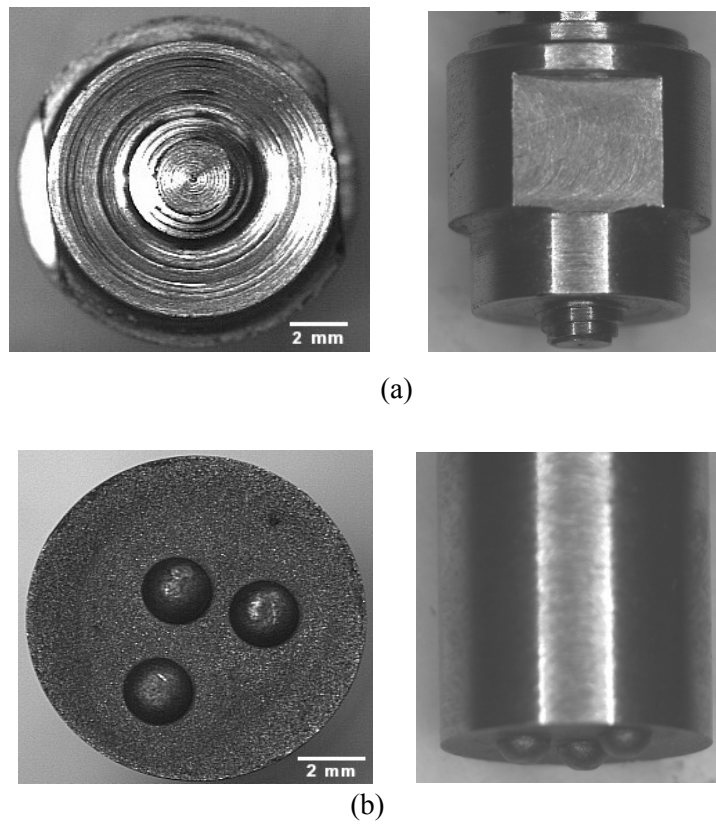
Macro images of (a) Conventional pin tool and (b) Off-center feature tool.
